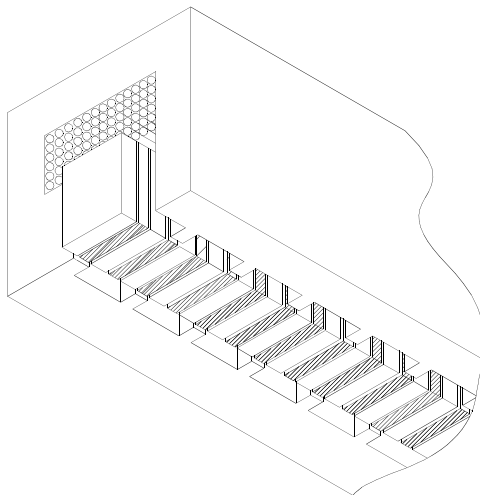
Double-sided, Single-winding TFPM machine with C-Core arrangement. Design proposed by Mecrow.
